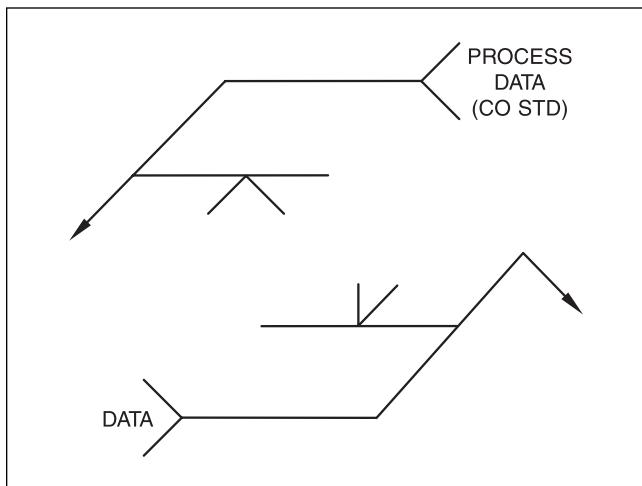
Significance of the Arrow in the Welding Symbol
